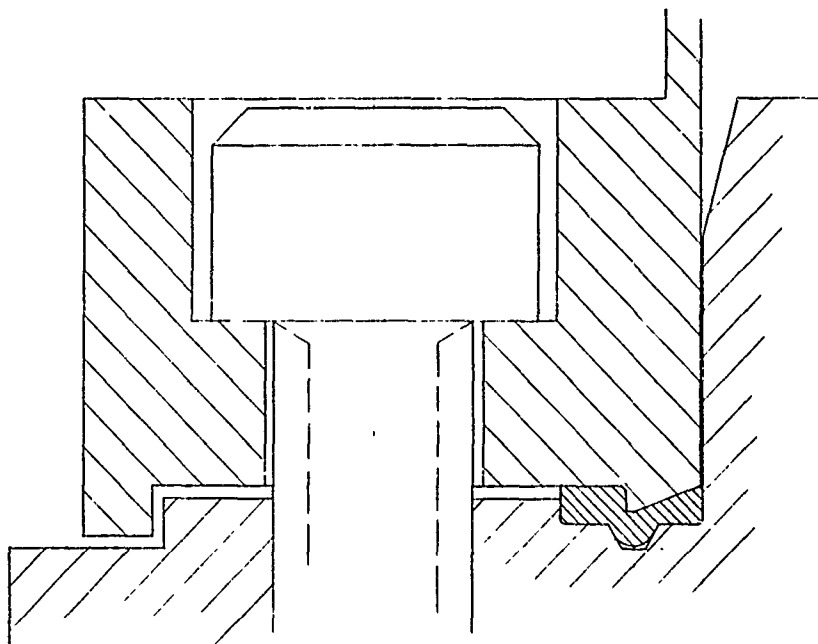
Captured Seal Design - Using .020 Diameter Wire
